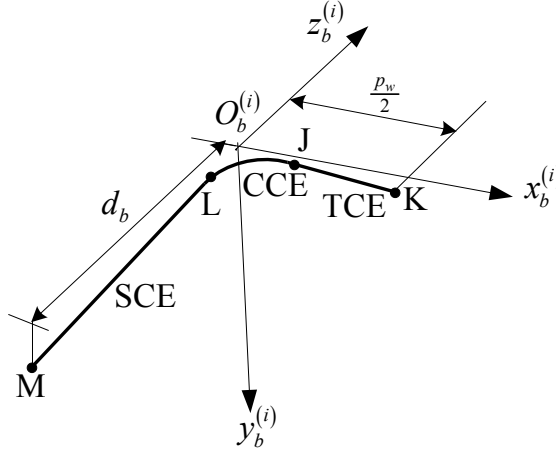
Top cutting edge and side cutting edge of inner blade.
